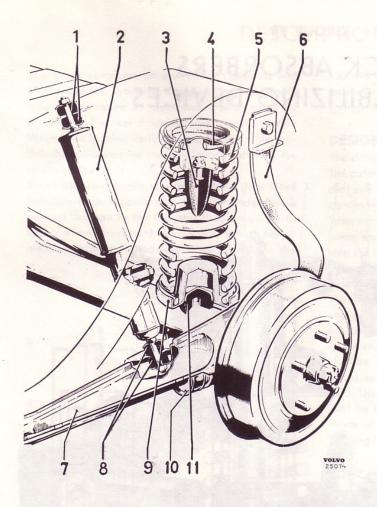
Rear axle suspension, 120, 1800, early prod.
